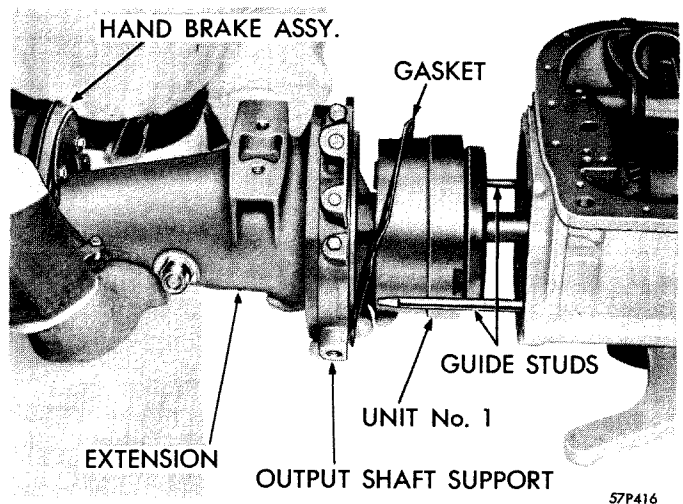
Removal of Output Shaft Support, Extension, Handbrake Assembly and Unit No. 1 as an Assembly
